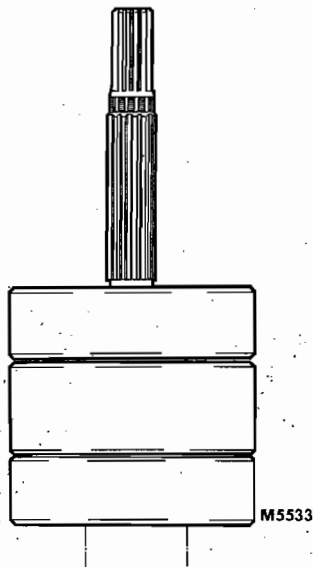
BRAKE DRUM ASSEMBLY ON INPUT SHAFT
